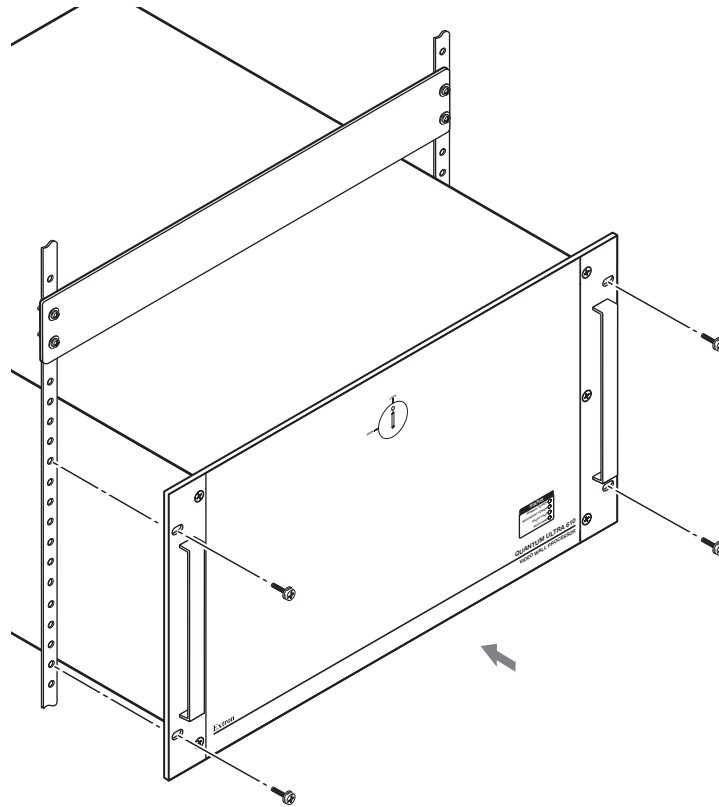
Rack Mounting the Quantum Ultra or Ultra II 610
